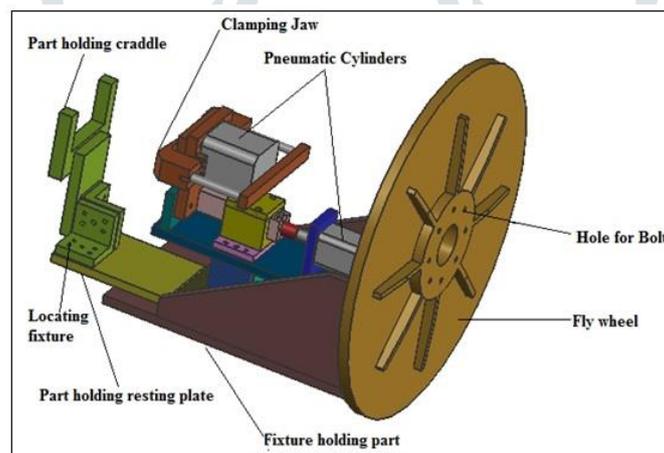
Tailstock Fly Wheel Part holding Fixture.
